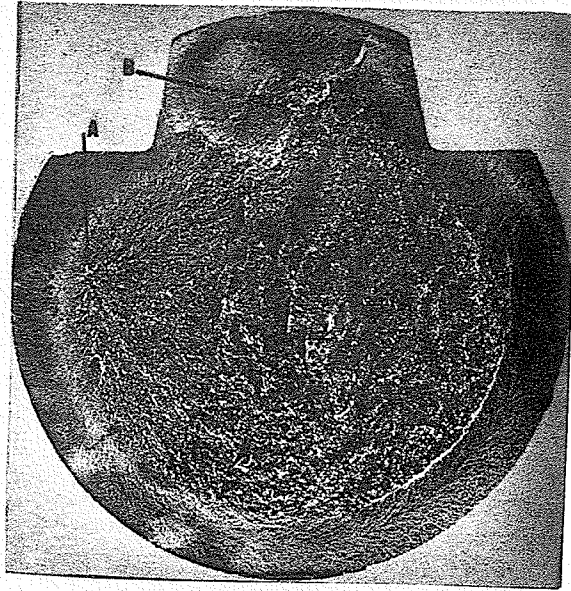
A rotating bending failure which began beneath the surface. Chevron marks point to both origins, A and B, and indicate brittle sudden final failure (10)
